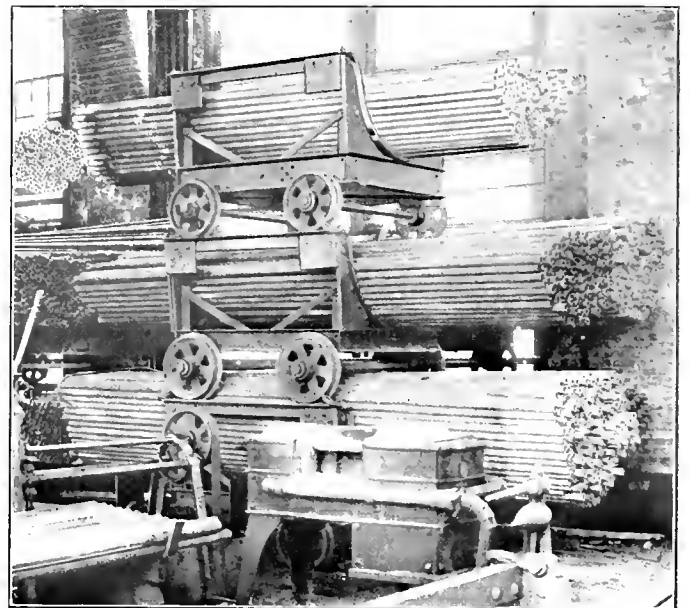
Method of Tying Flue Cars on Storage Tracks, Each Car Holds One Complete Set of Tubes.
